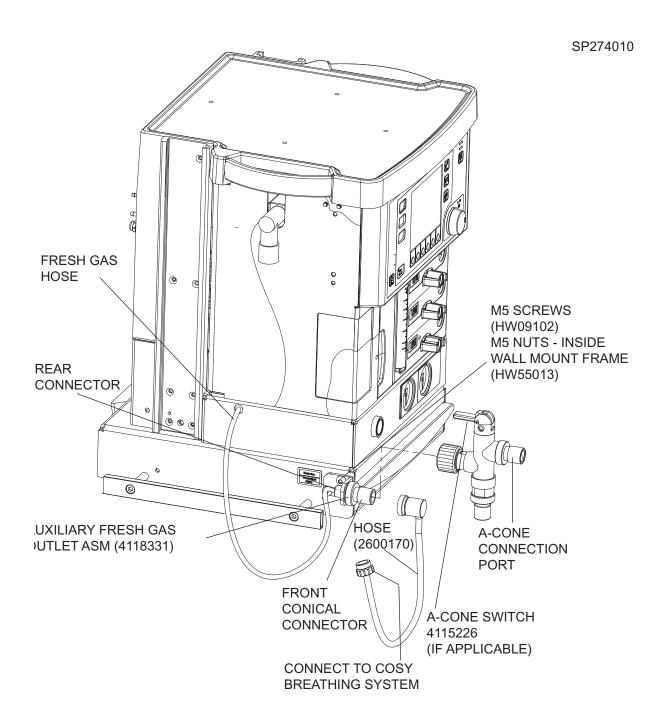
Left Side Wall Mount Auxiliary Fresh Gas Outlet Installation
